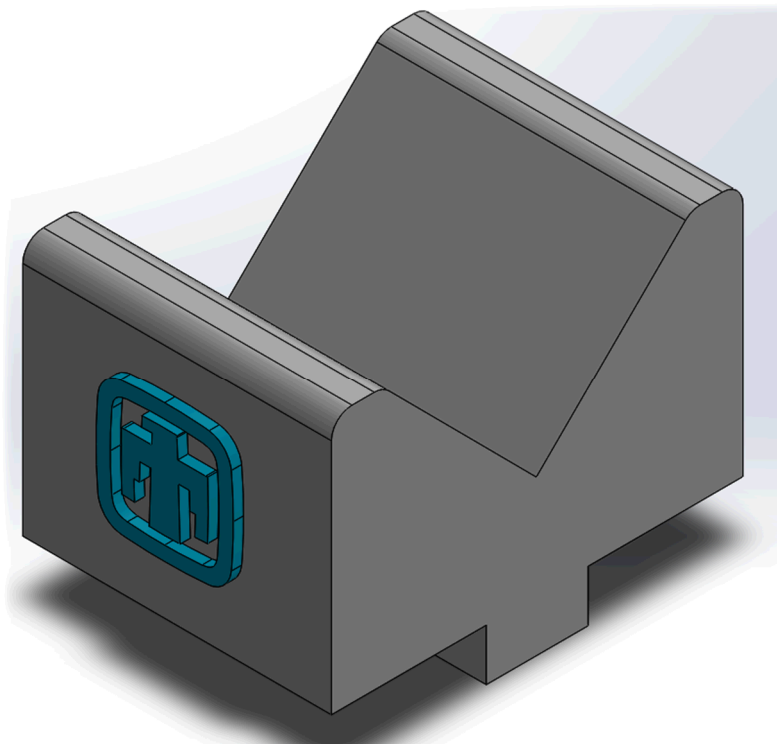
Envisioned Setup for the Measurement of Thread Wires.
